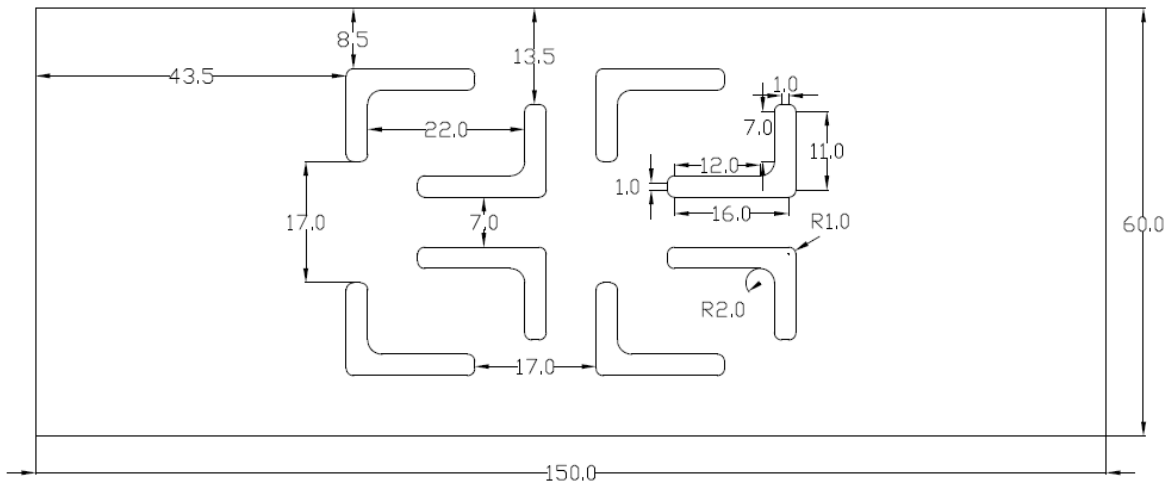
Technical drawing of the specimen geometry with 8-L-shaped cut-outs and vertical symmetry.
